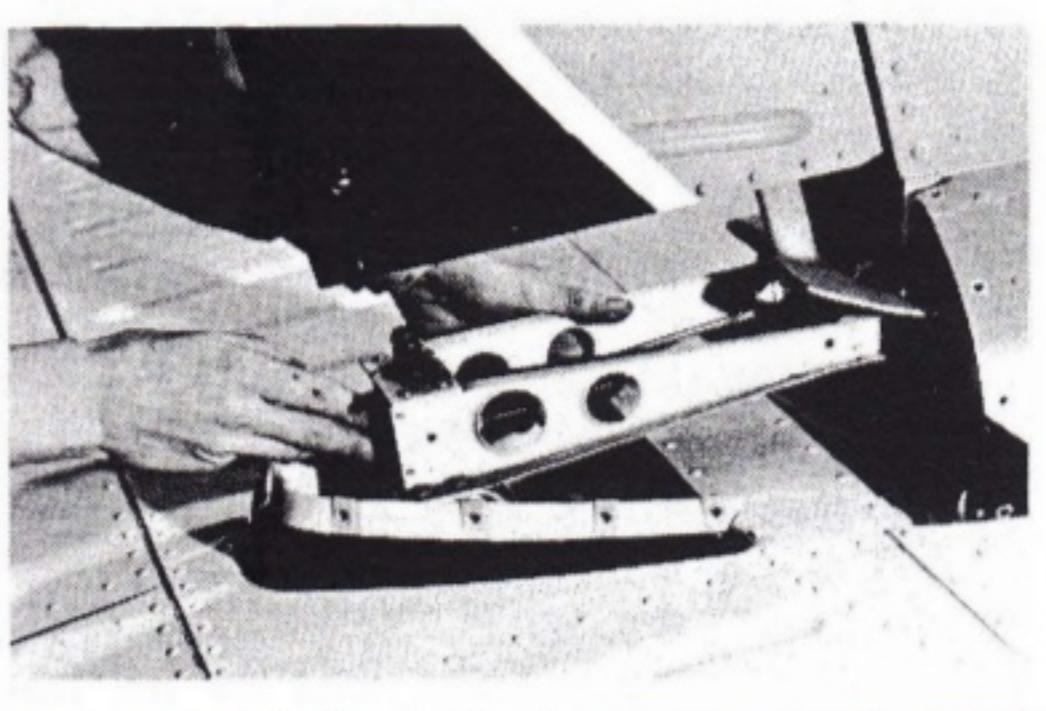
Control surface travel should be checked especially if it has been removed and reinstalled.
